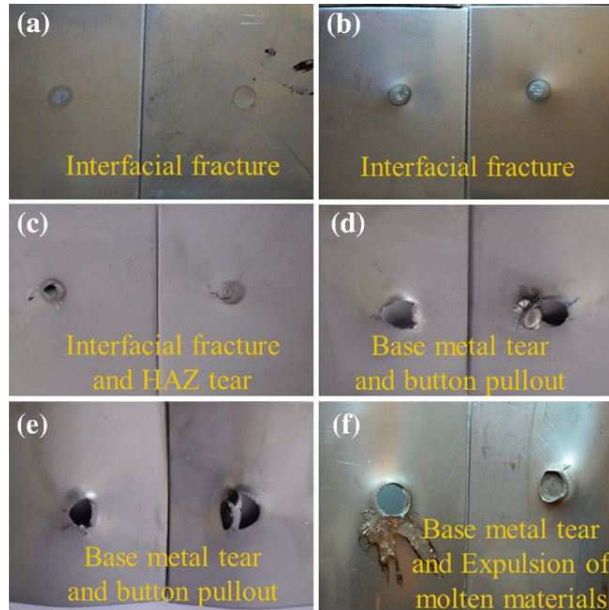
Various failure modes and their corresponding current. (a) Welding current of 4 kA; (b) Welding current of 5 kA; (c) Welding current of 6 kA; (d) Welding current of 7 kA; (e) Welding current of 8 kA; (f) Welding current of 9 kA [29].
